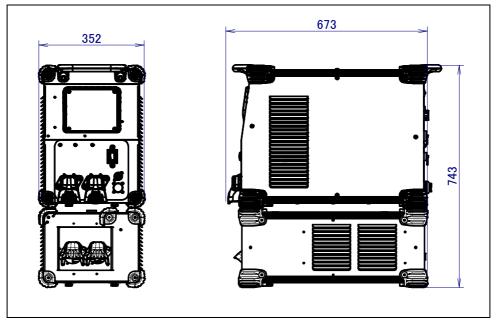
(e) Welding power supply of ROBOWELD *i*C/H3 + STT module (Power Wave R350)
